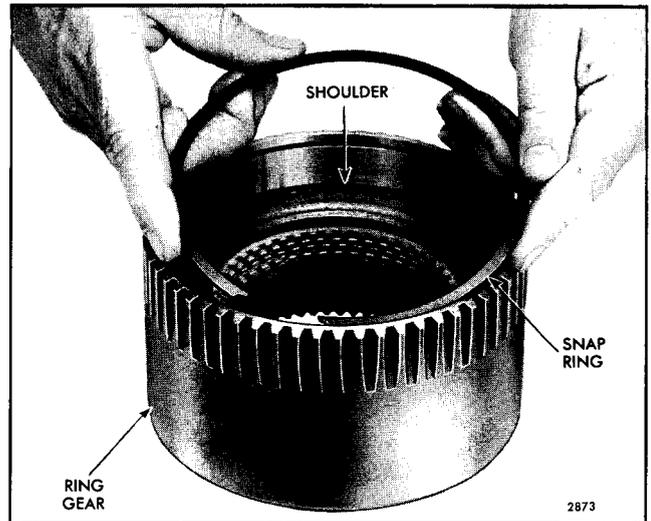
Installing Forward Clutch Pressure Plate Snap Ring in Ring Gear
